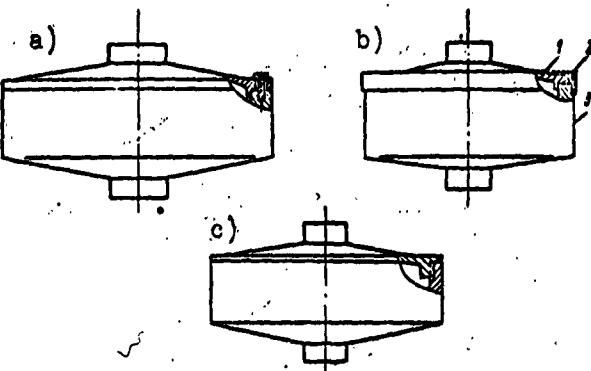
Attachment of covers to housings: a) Screws; b) with internal thread; c) with special ring.
